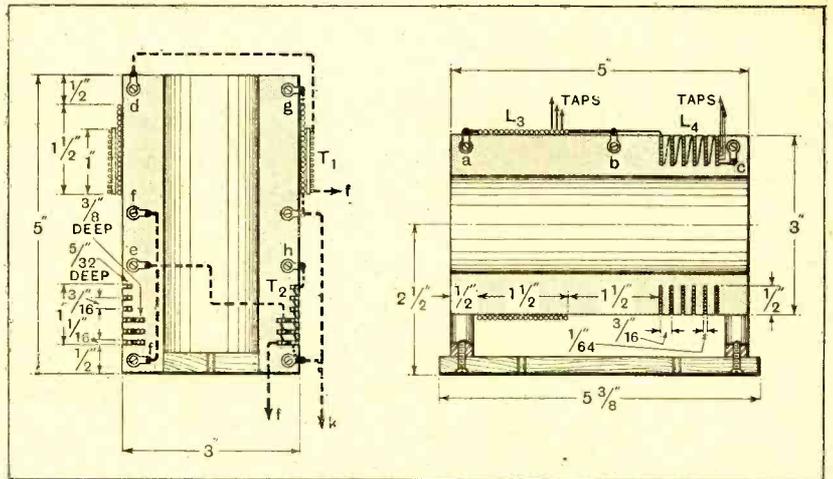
Sectional drawings showing construction of H.F. transformers and (right) long- and short-wave grid coils.
